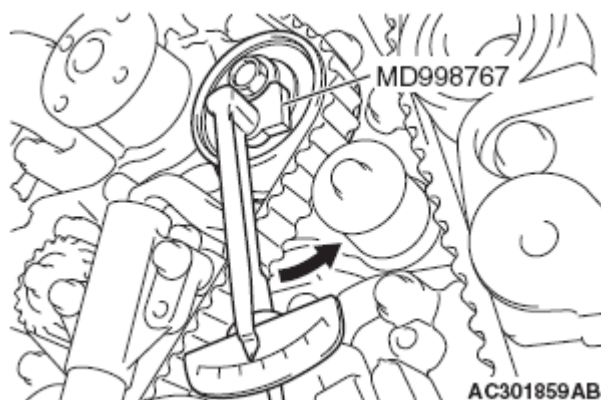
Tightening Timing Belt Tensioner Pulley Mounting Bolt
